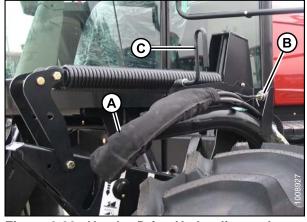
Header-Drive Hydraulics and Electrical Harness Connection
